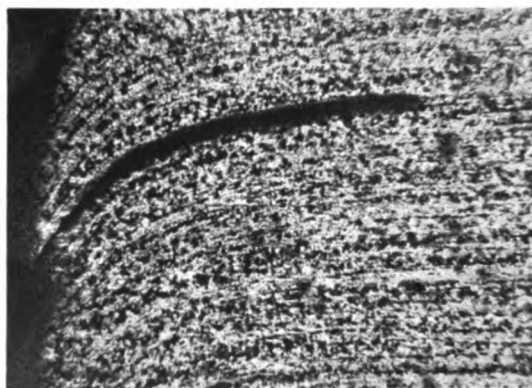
Macrograph of Chrome-Molybdenum Steel Showing Stamping Crack. $\times 30$.
